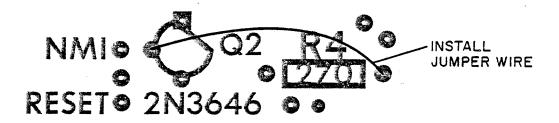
R4 - Q2 JUMPER WIRE PLACEMENT
